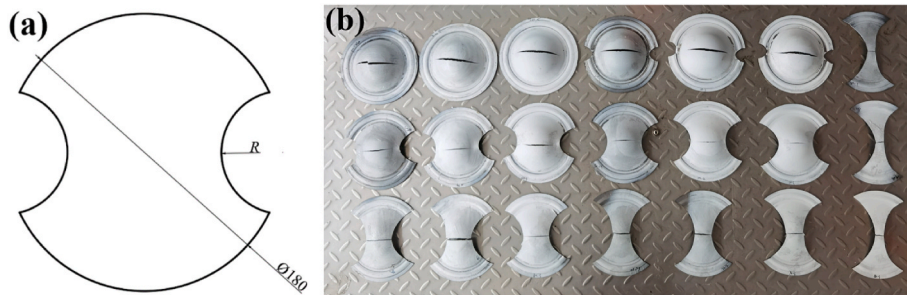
(a) Dimensions of the Nakazima test specimen (unit: mm), and (b) photographs of specimens with fracture.
